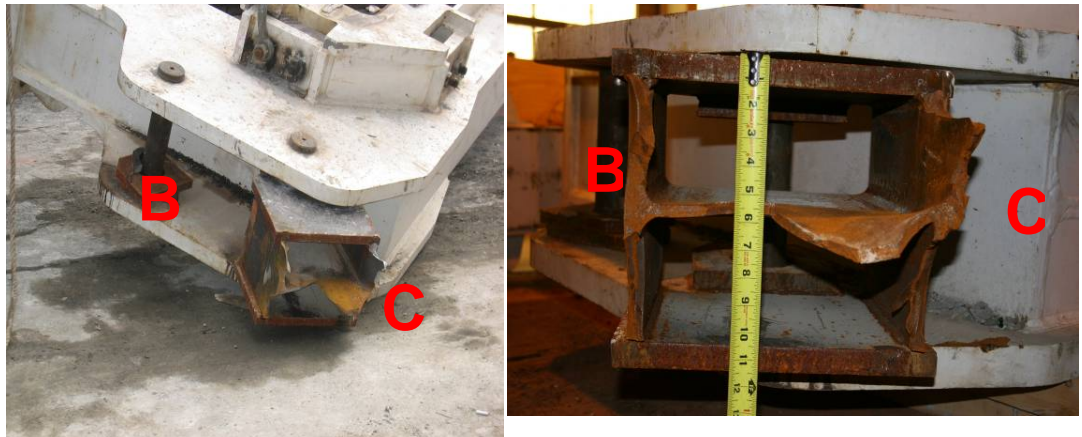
Failed base plate 9A. Photo provided by the NYCDOB.
